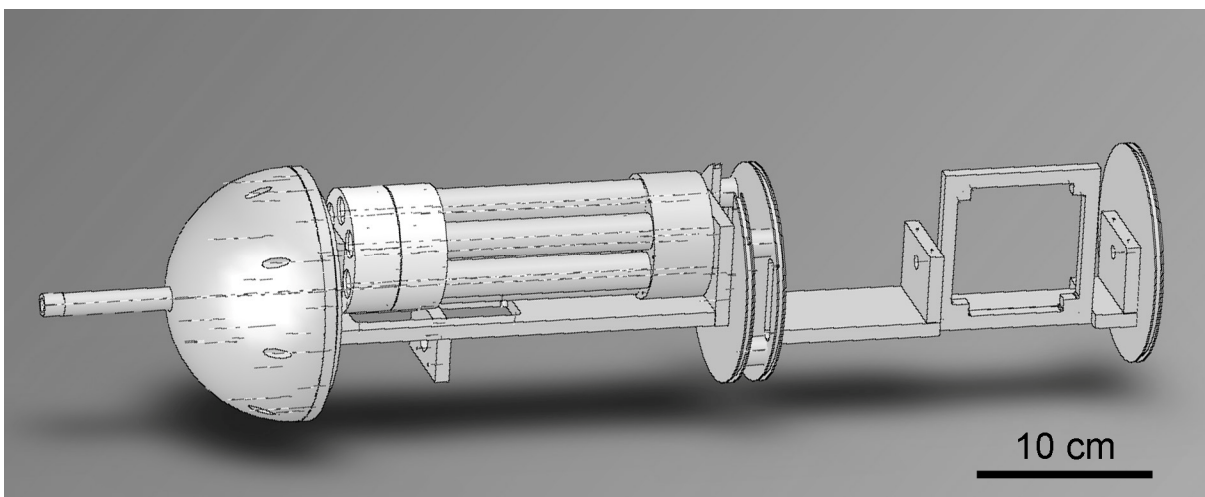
Giant Particle Collector (GPAC): schematic drawing of the technical component assembly
